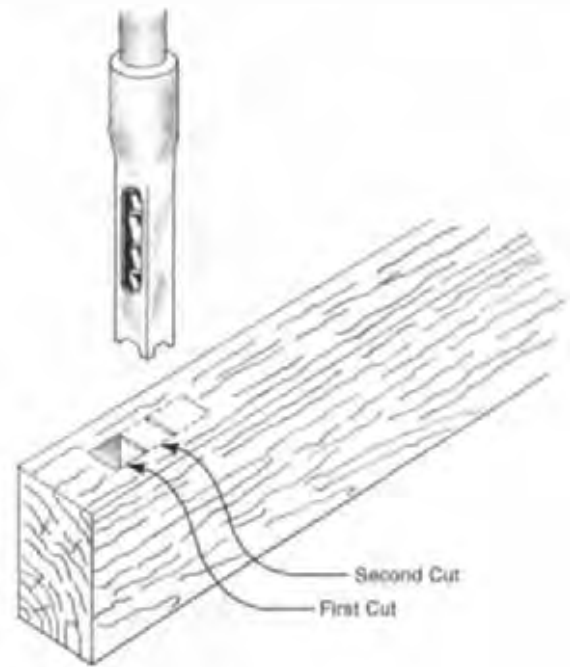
C5-1 Successive cuts with a mortising chisel assembly produces a rectangular mortise in the workpiece.
